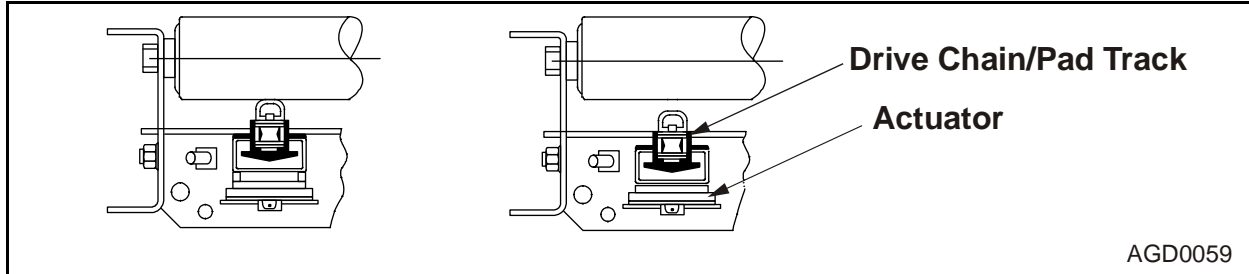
9 Drive Chain/Pad and Track - Raised (left); Lowered (right)
